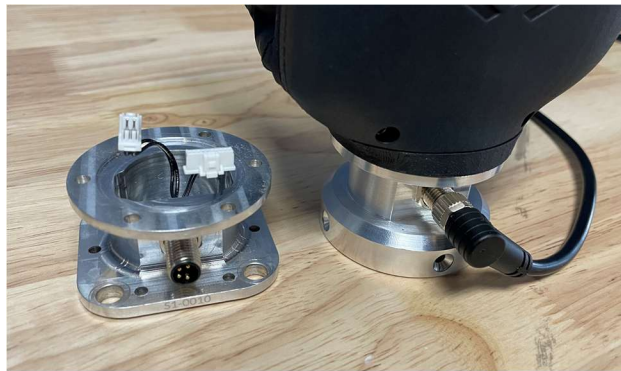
Wrist Adapter (left) and Hand with Adapter Mounted (right)
